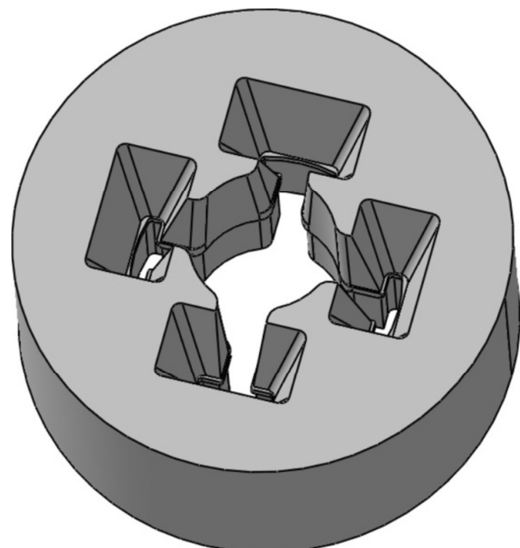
Top view of the die with feeder in thinner sections and variable bearing length
